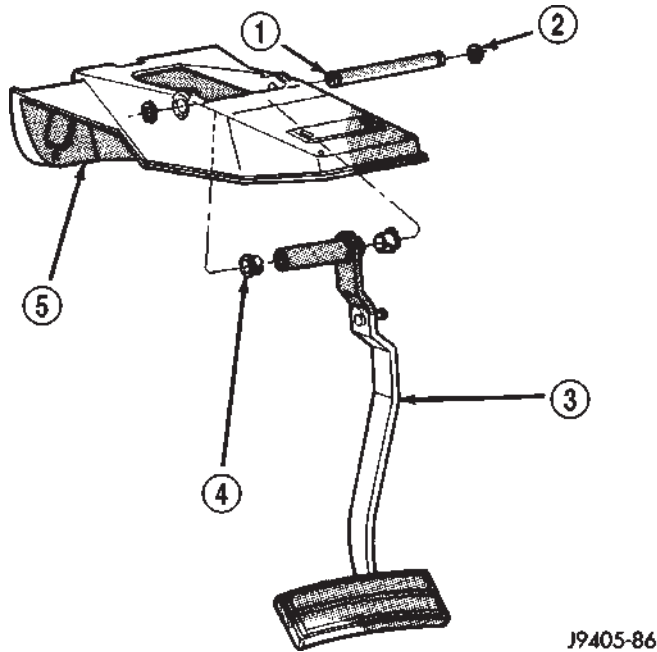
Brake Pedal Mounting (With Automatic Transmission)
